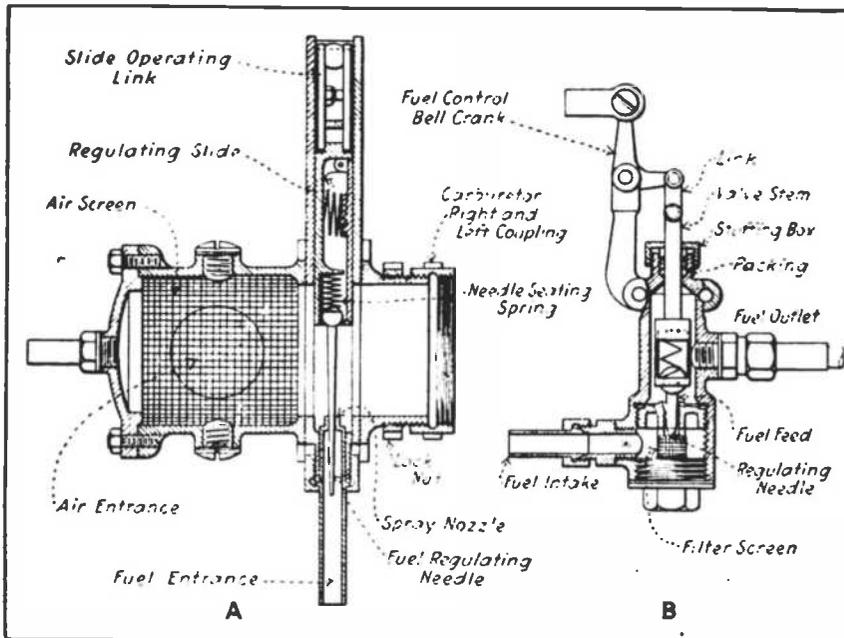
The Le Rhone carburetor at A and Fuel supply regulating device at B
